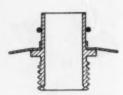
CONSTRUCTION FEATURES OF BREATHER ASSEMBLY
